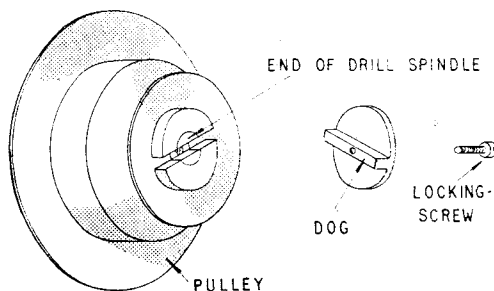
Method used for transmitting the drive from the pulley to the shaft
